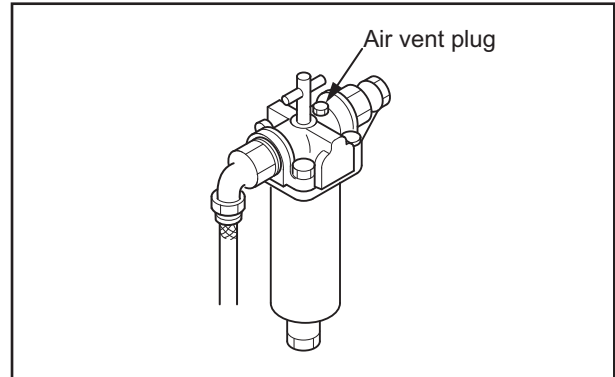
Fuel Filters (Wire-element Type) - Bleed Air
